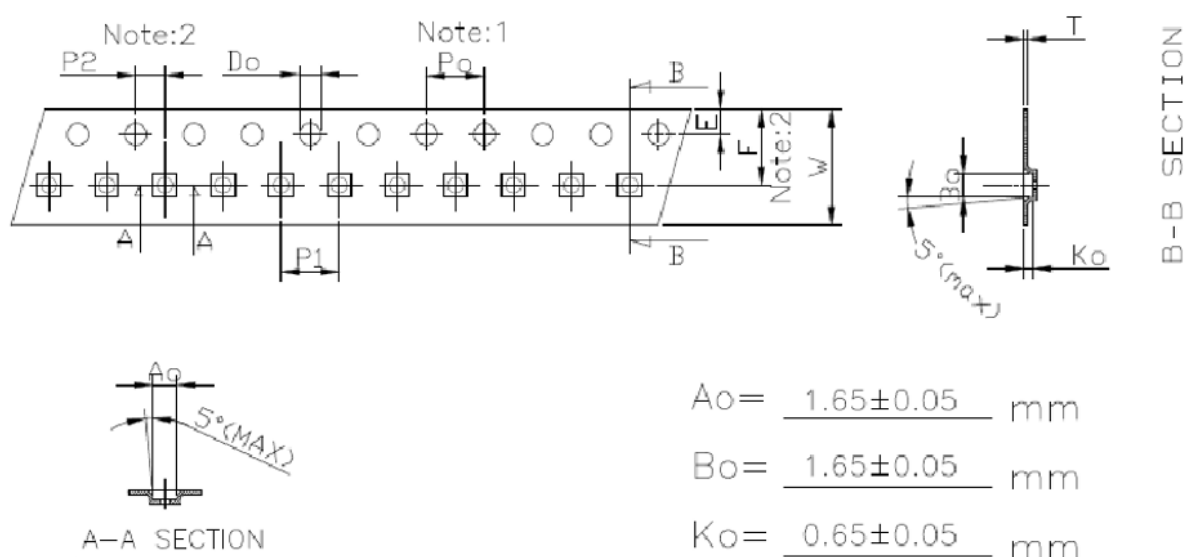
Tape and Pocket Drawing for LGA-4 Package
